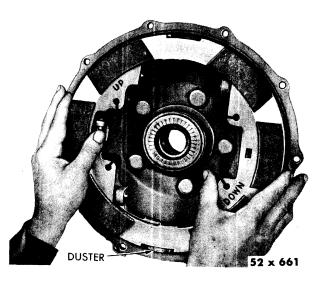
Removal and Installation of Pressure Plate Assembly (Front Disc Brake)
